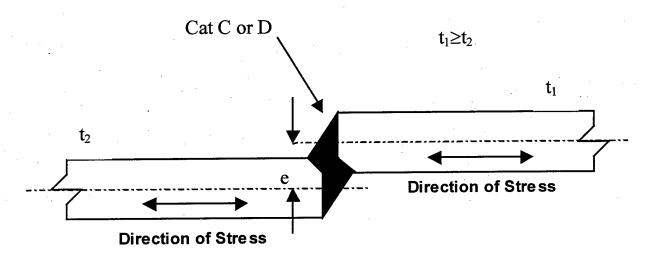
Misalignment in Butt Welds, Full Penetration
